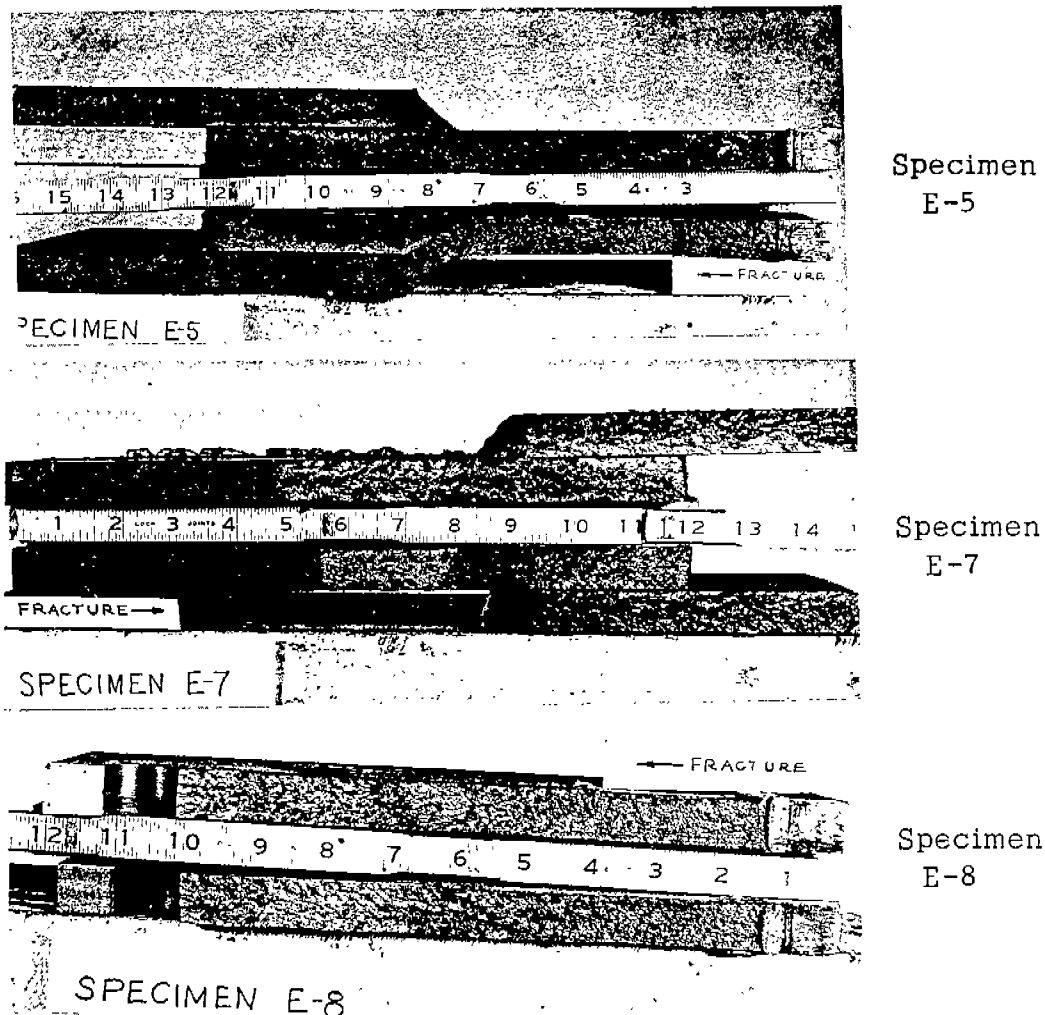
Fracture Surfaces for Specimens E-5, E-7, and E-8.
